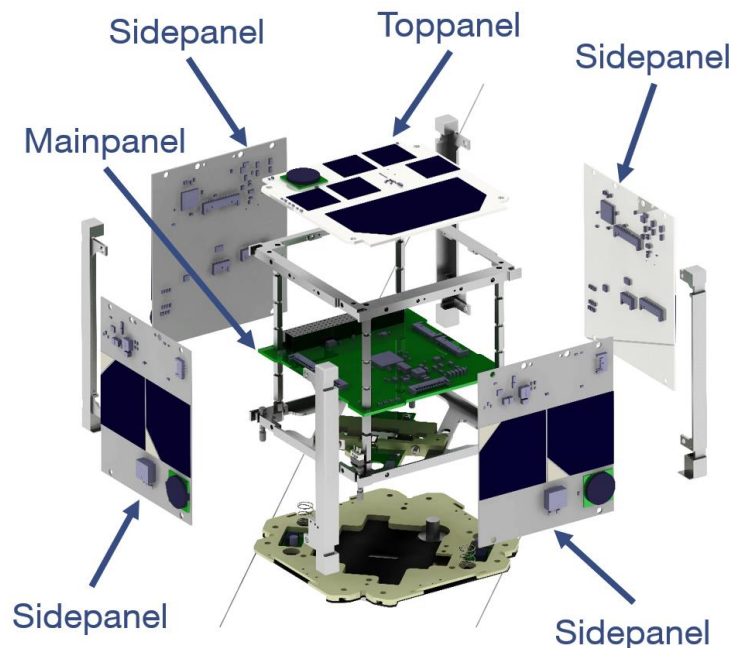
Exploded View of MOVE-II's ADCS [11]
